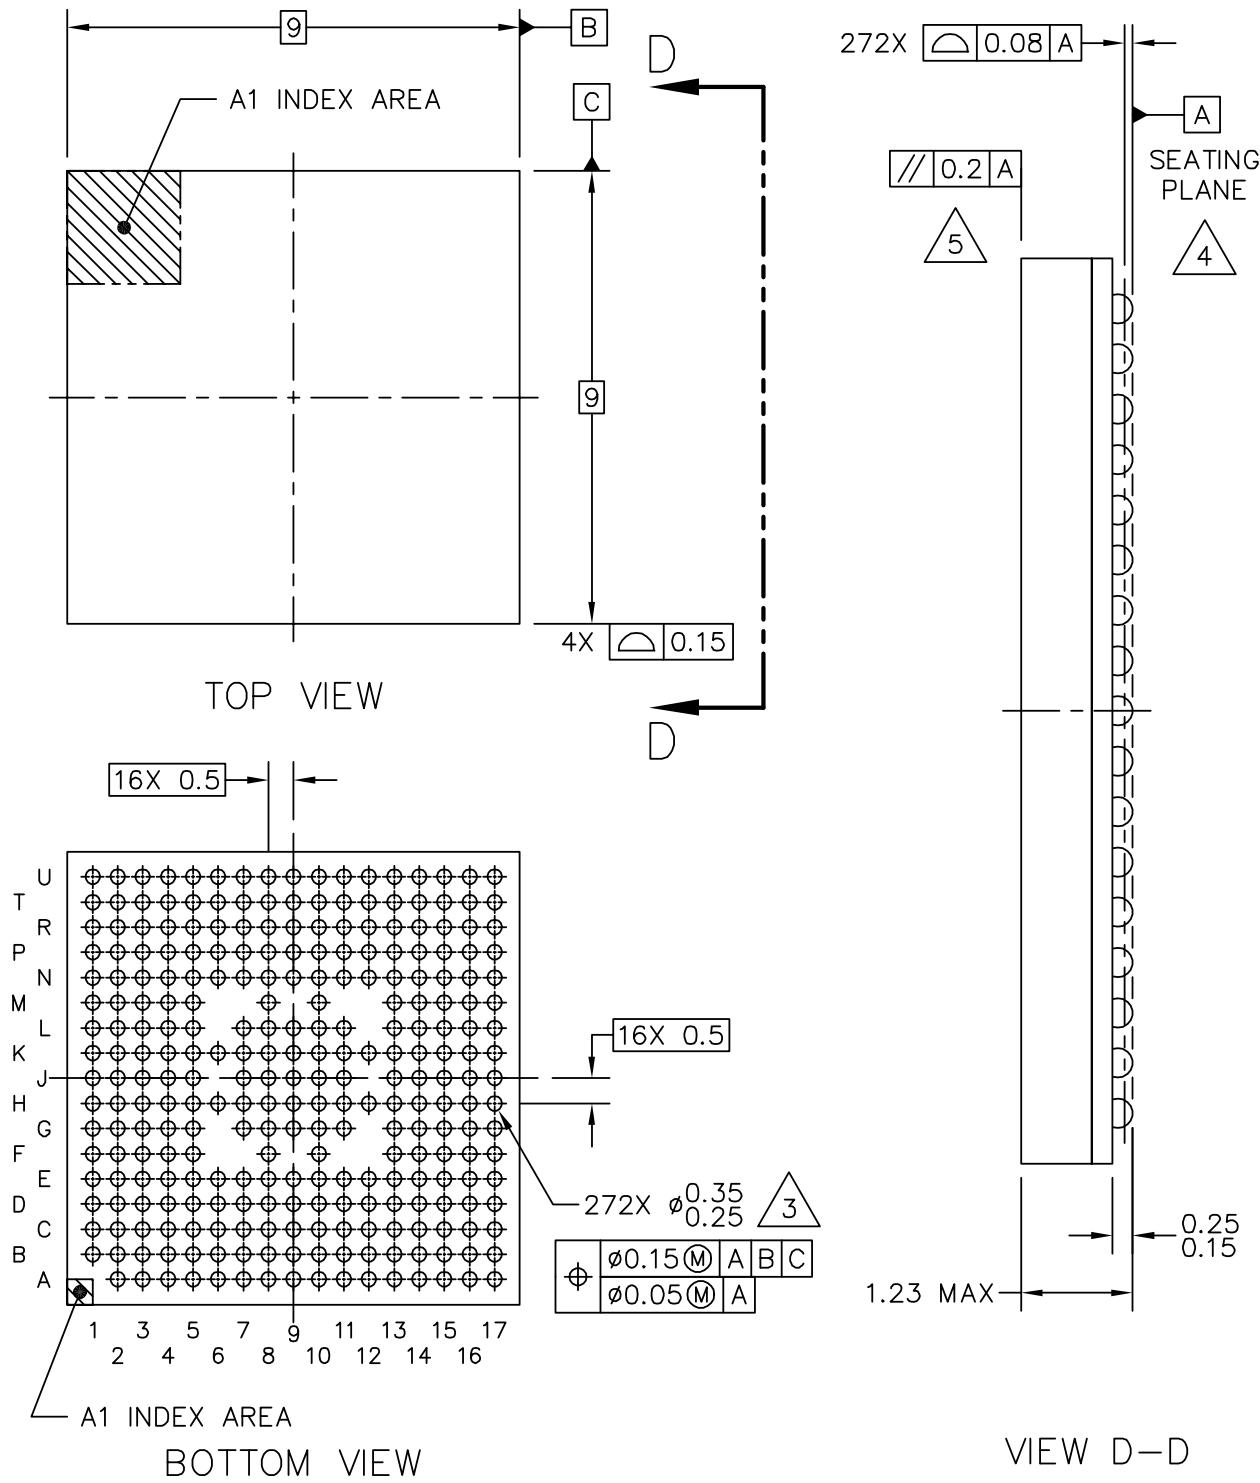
9X9 mm BGA, Case x Package Top, Bottom, and Side Views
